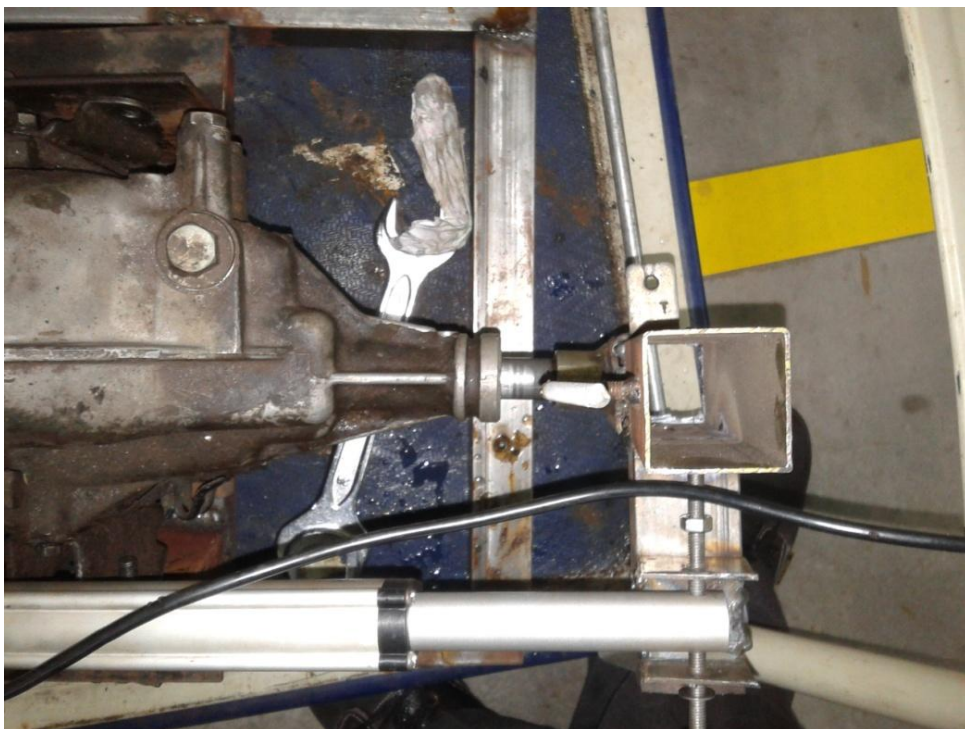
A figure showing actuator stop advance and complete gear shifting from 3rd gear to 4th gear
